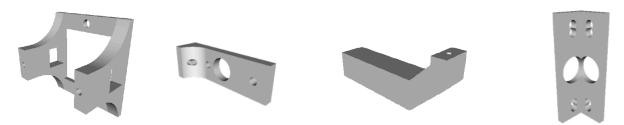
CAD drawings of the base mount, yaw mount, head component and the double joint
